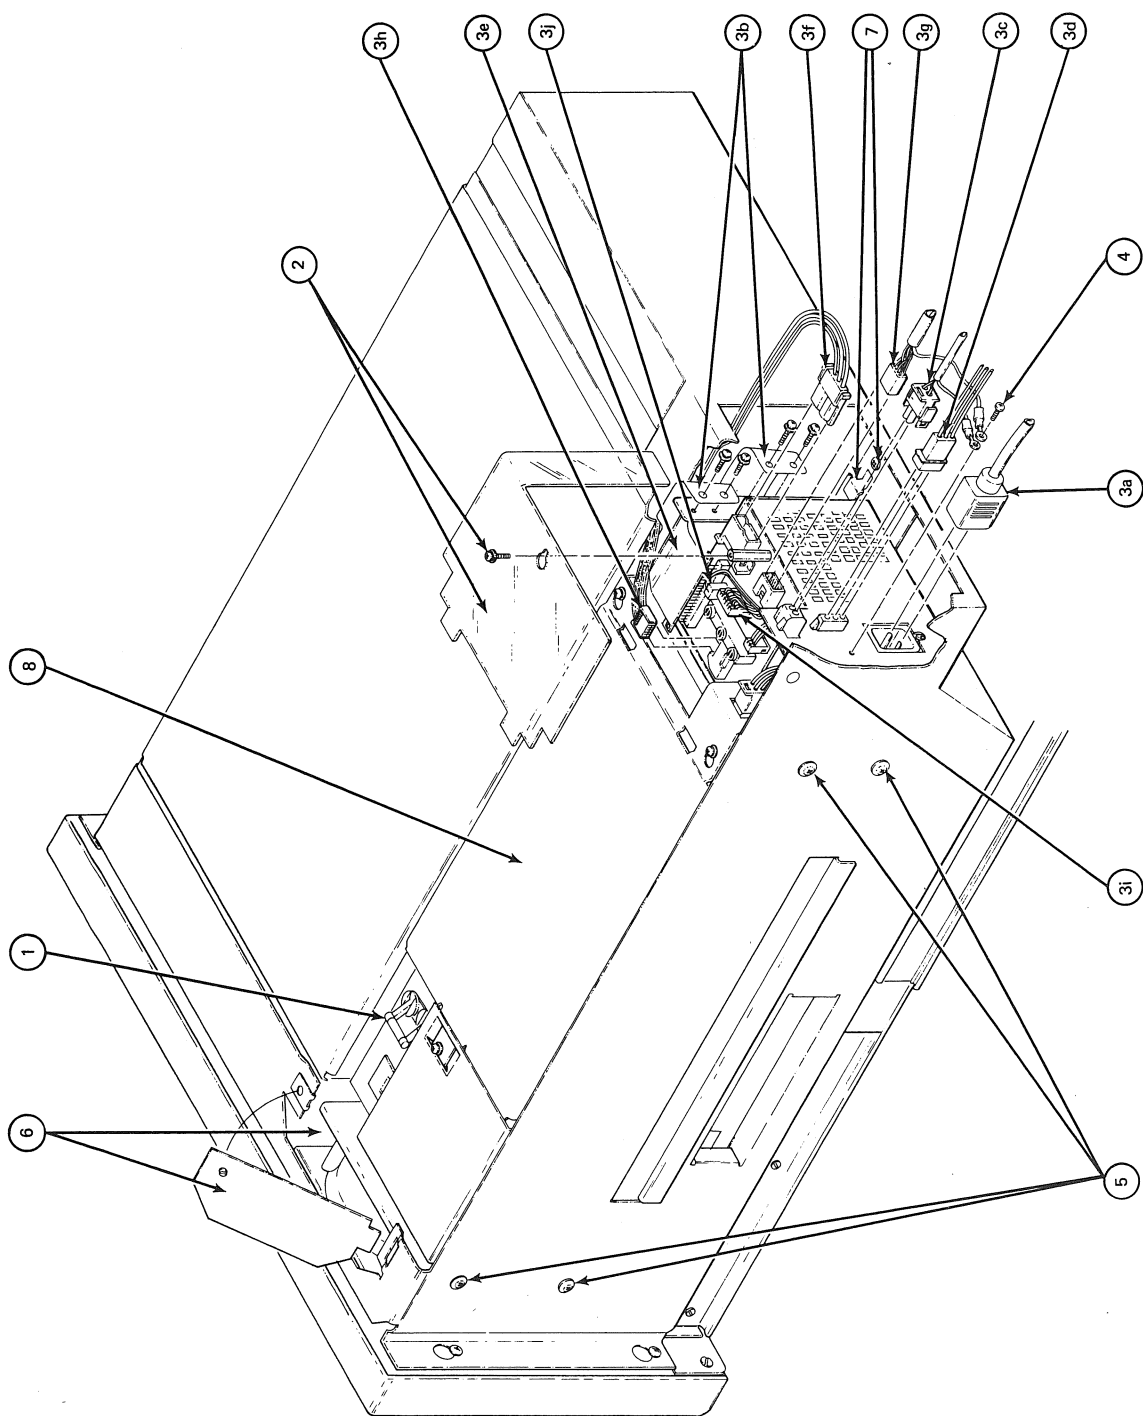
Power Supply Removal from the BA11-Z Mounting Box
